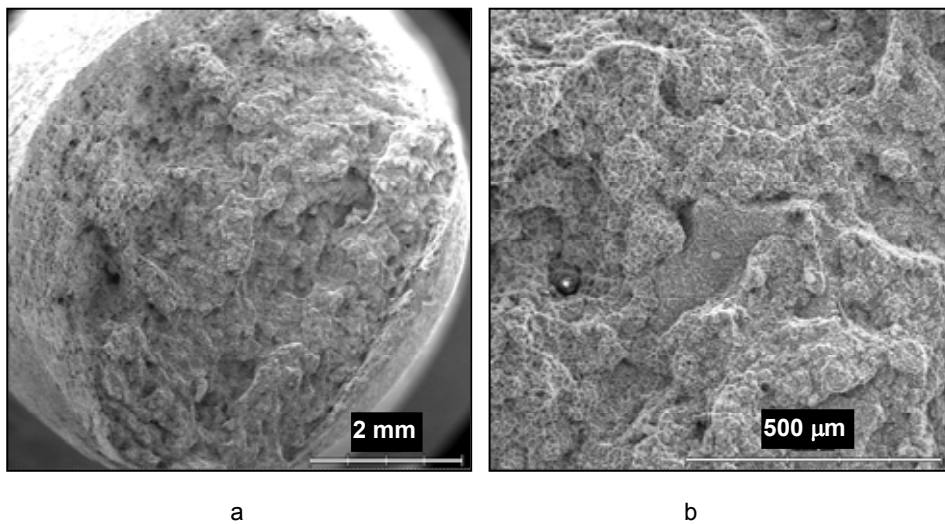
Fracture surface of the plate weld joint crept at 575°C/160 MPa/3 793 hrs: a) general view, b) detail of the central part. Specimen C15, SEM micrographs.
